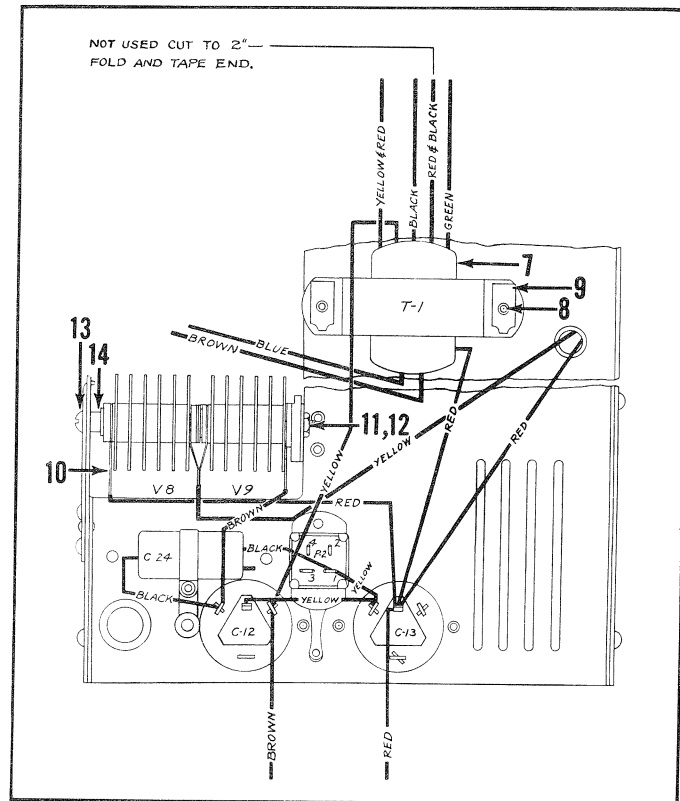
B. TERMINAL BOARD AND PLATFORM ASSEMBLY
